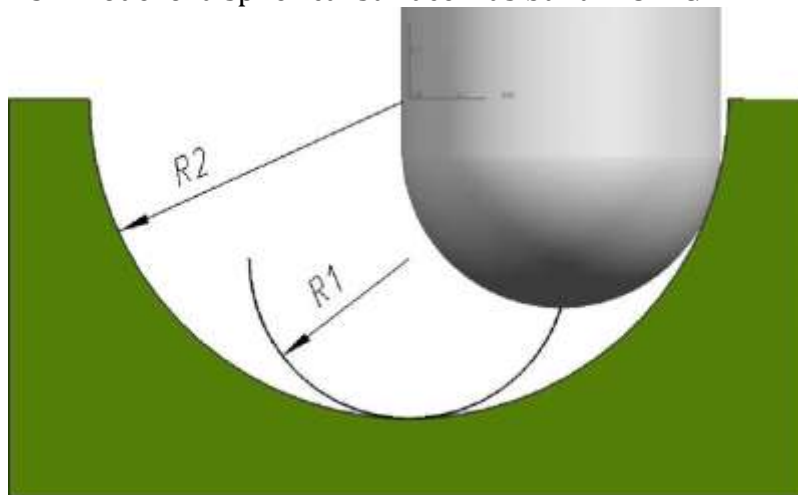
Spherical surface programming R 1- radius of the cutter trajectory, R 2- radius of the machined surface.
